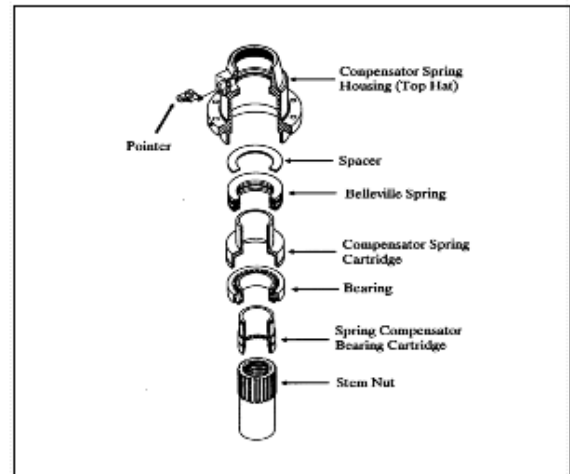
SB Belleville Spring Compensator Housing Cover Assembly
